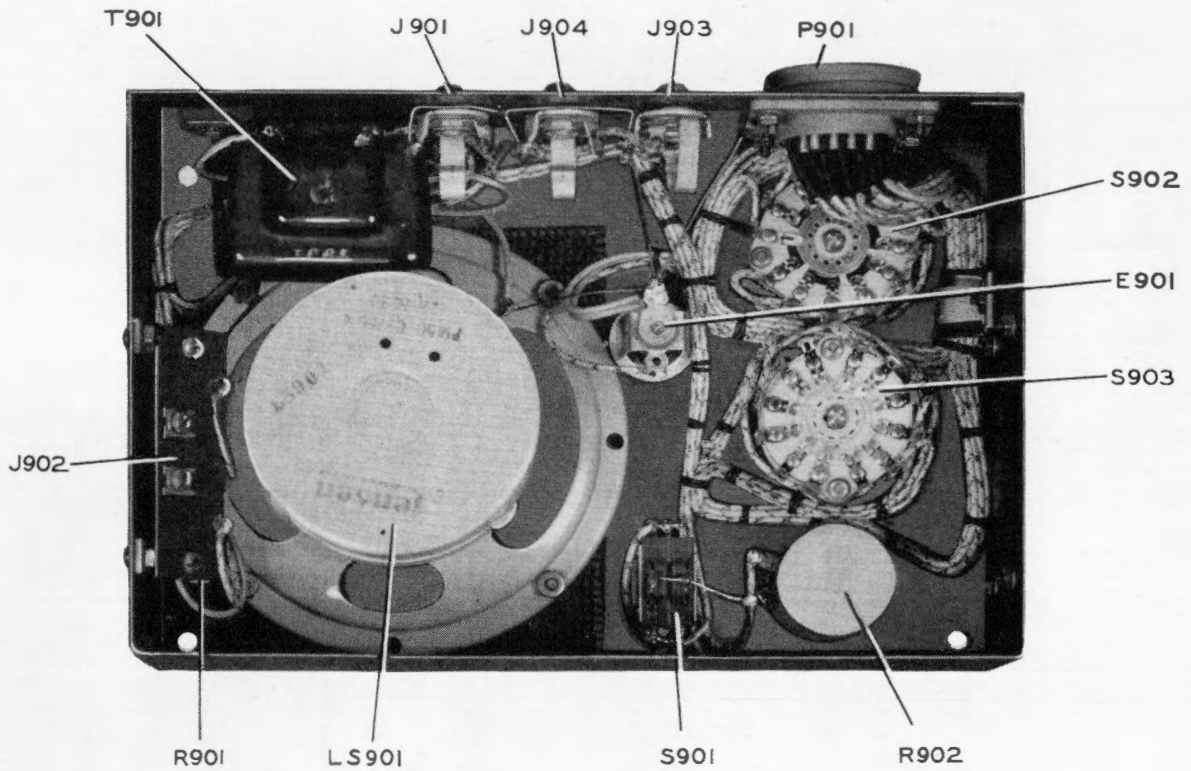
Type COL-23410 Remote Control Unit—Bottom Open View
